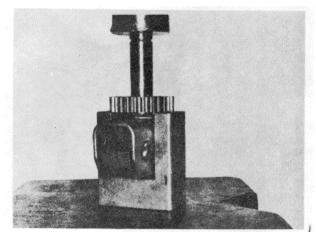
G-36. Removing Gear from Weight Carrier with ST- 1231 UPPER AND LOWER UPPER
